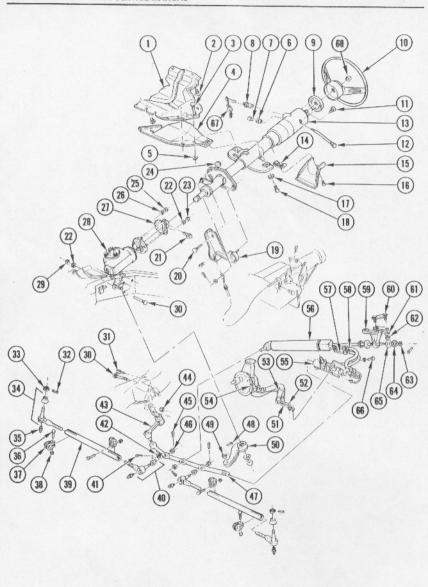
Corvette Steering Column & Related Parts (Typical)
